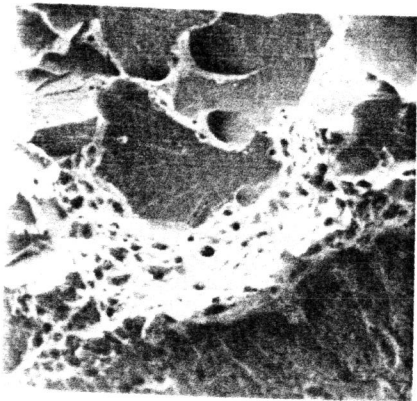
Fracture Surface of a Double Edge Cracked Specimen
